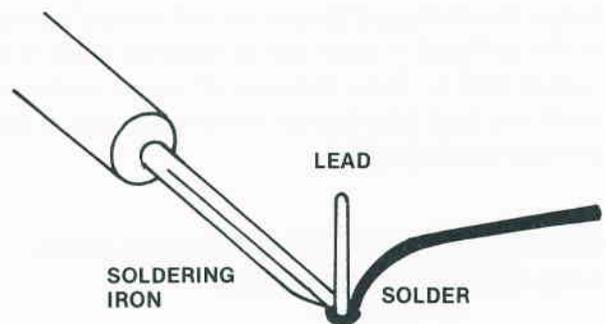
Place the soldering iron on the opposite side of the lead from the solder.
